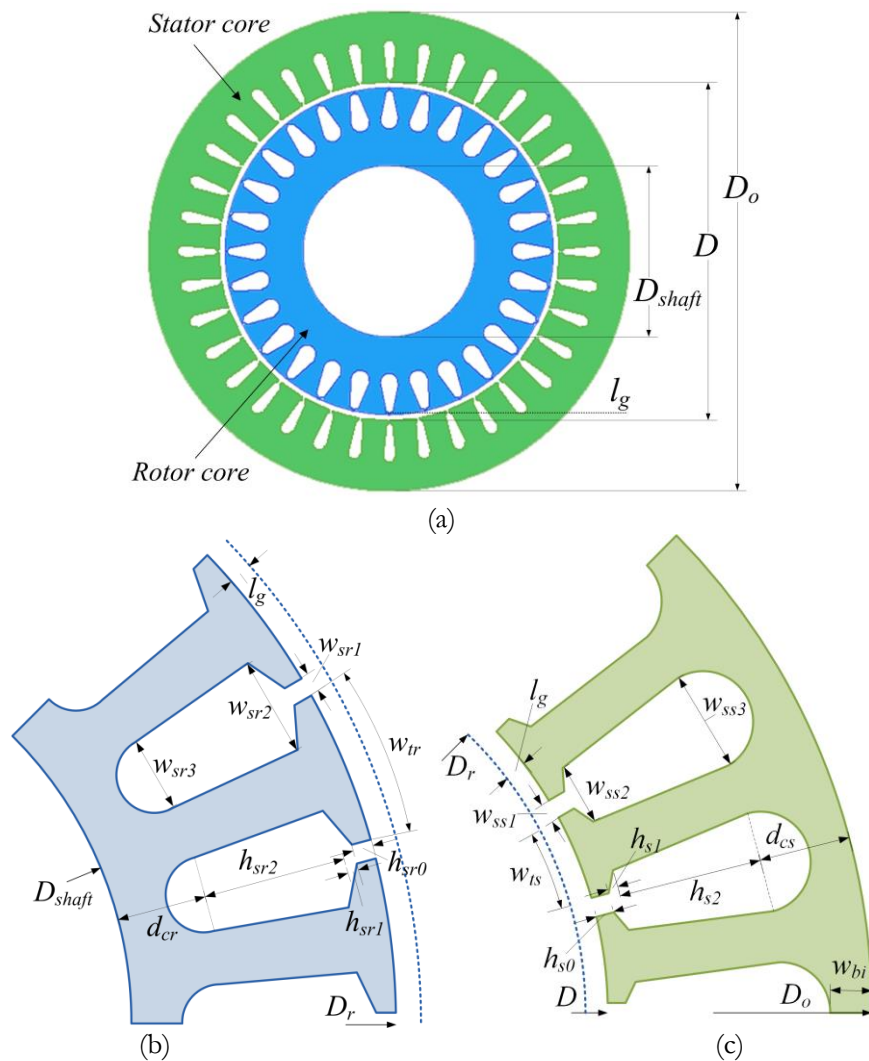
A typical SCIM geometry: a) main dimensions, b) detailed rotor slot, b) detailed stator slot.
